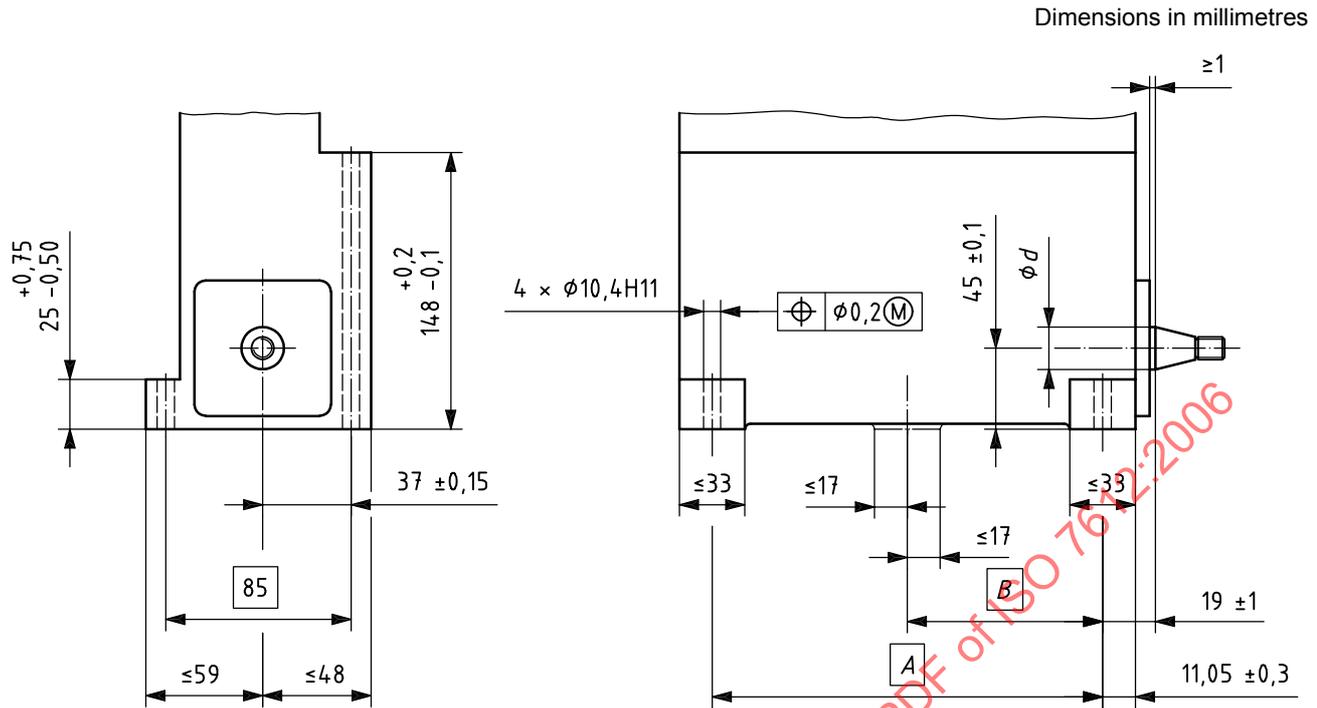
Base-mounted in-line fuel injection pump — Type 3
